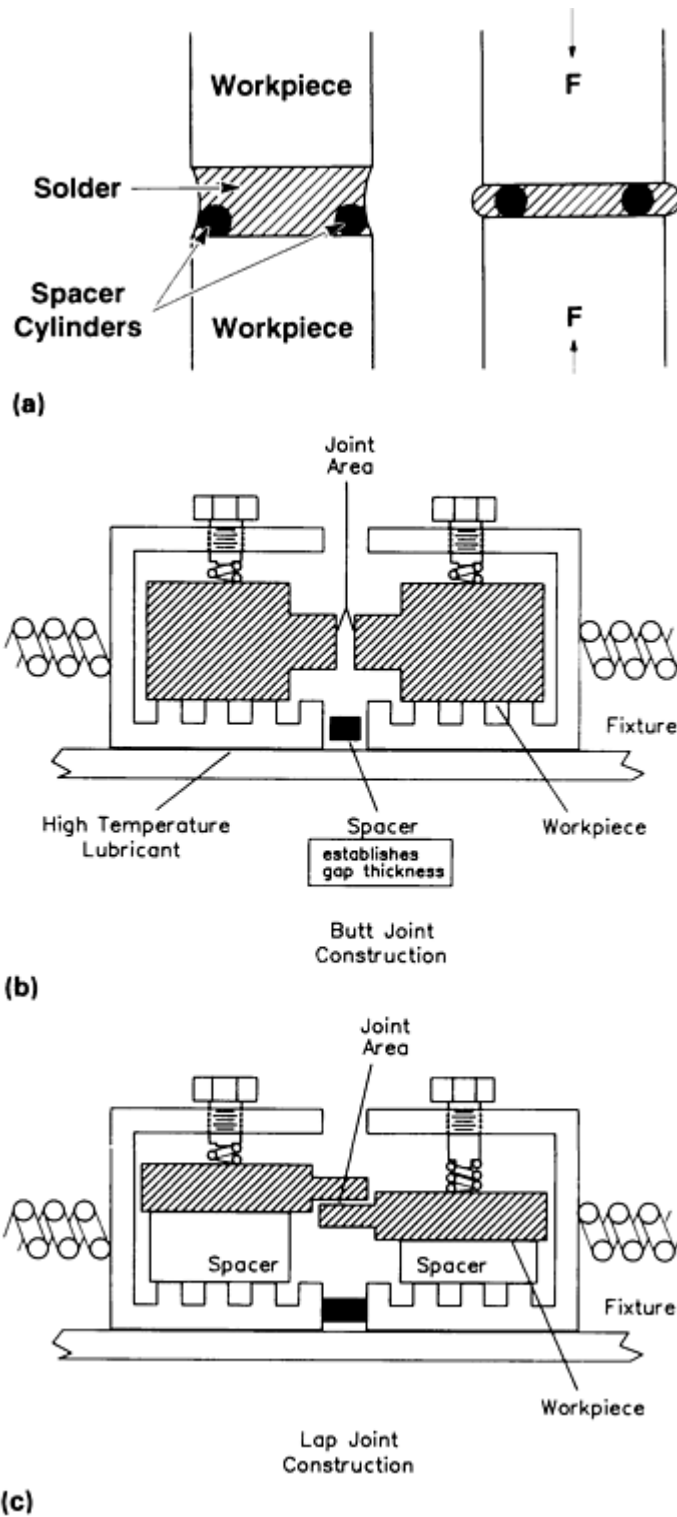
TECHNIQUES TO MAINTAIN JOINT GAPS. (A) BUTT JOINT WITH SPACERS IN THE SOLDER. (B) BUTT JOINT WITH SPACER IN THE FIXTURE. (C) LAP JOINT CONSTRUCTION
